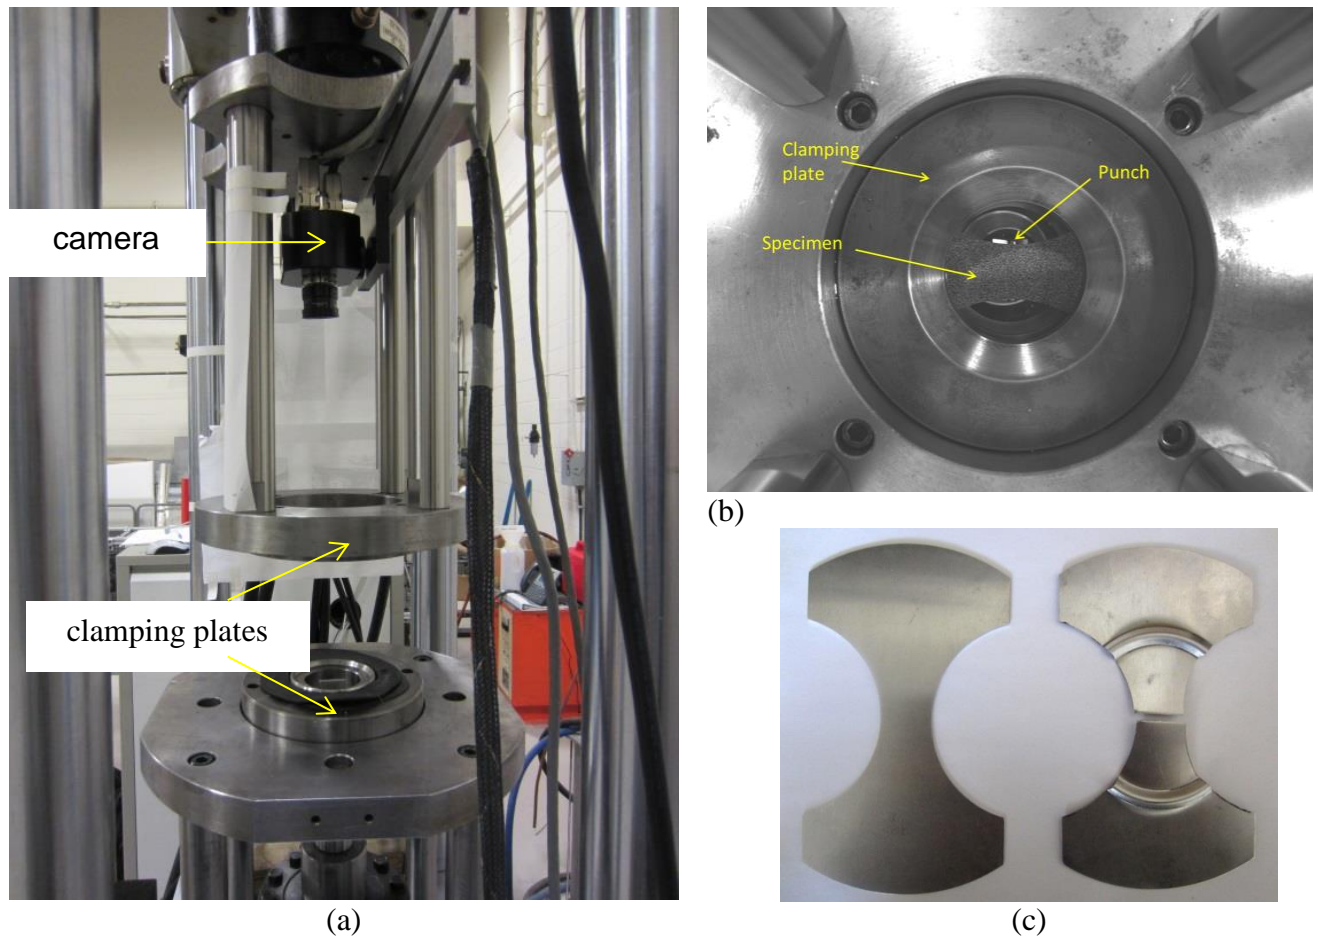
ASBT test details, (a) experimental test set-up with camera mounted above the test-jig for strain measurement, (b) camera view of tensile surface of deformed test specimen, and (c) specimen before the test and after fracture.
